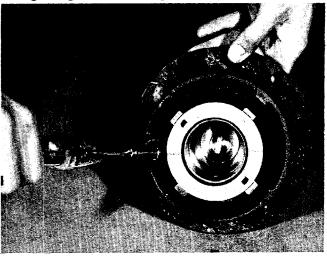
Removing Oil Regulator Valve from Pump End Bearing Head Assembly.
